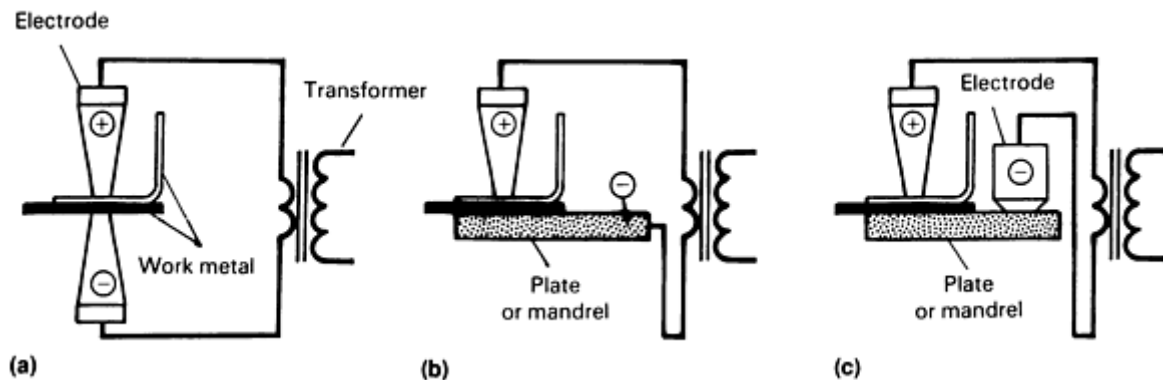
RELATION OF WORK METAL TO ELECTRODES WHEN MAKING SINGLE-SPOT WELDS BY DIRECT WELDING
